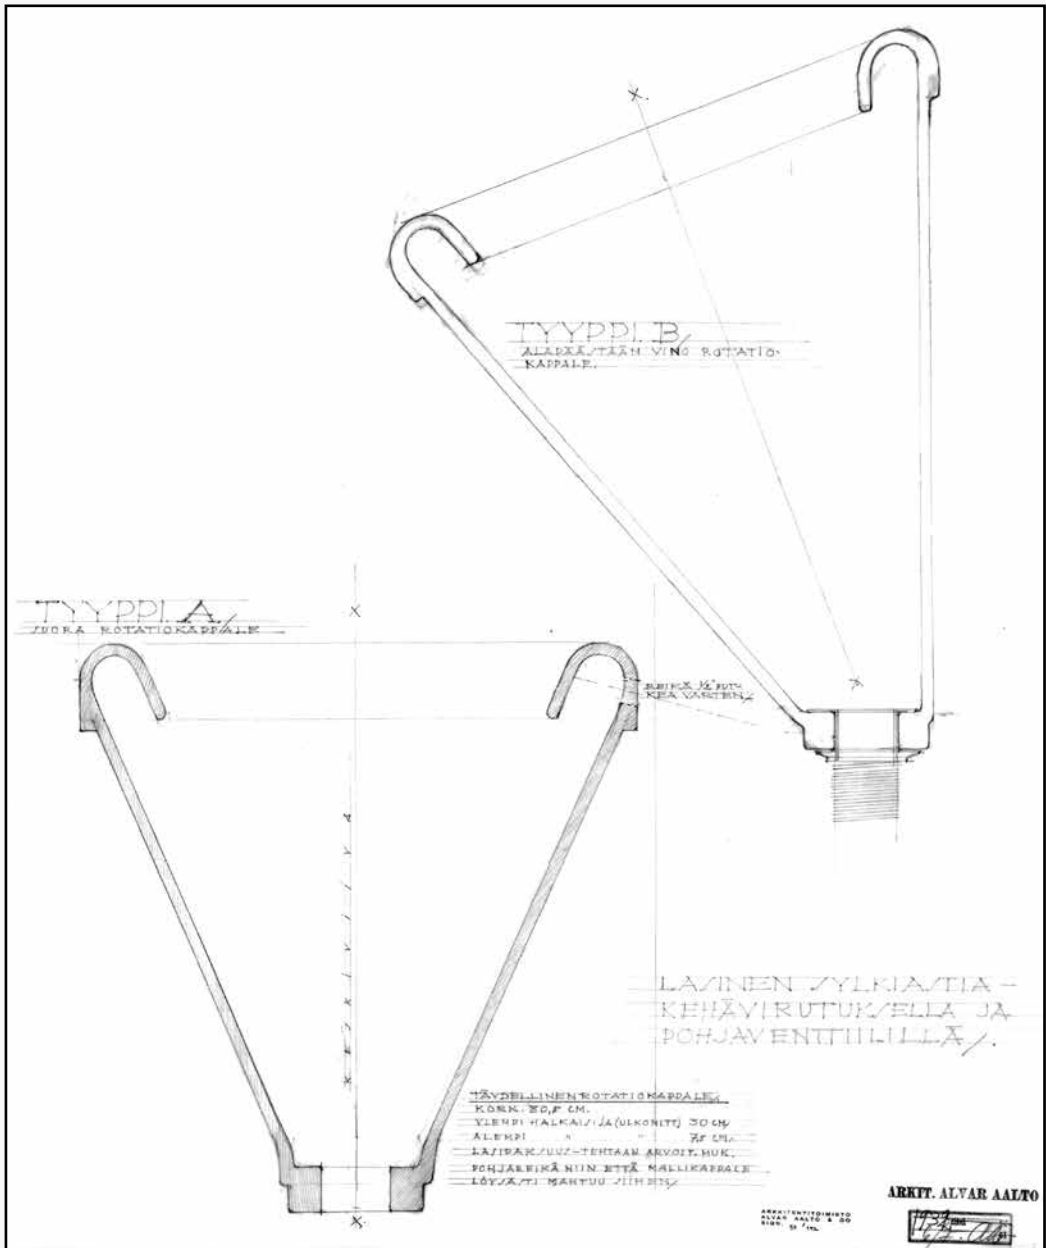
The glass spittoon designed by the architect was equipped with a circular rinsing action and bottom drain. Drawing No. 50-192. The drawing has been edited. AAM.
